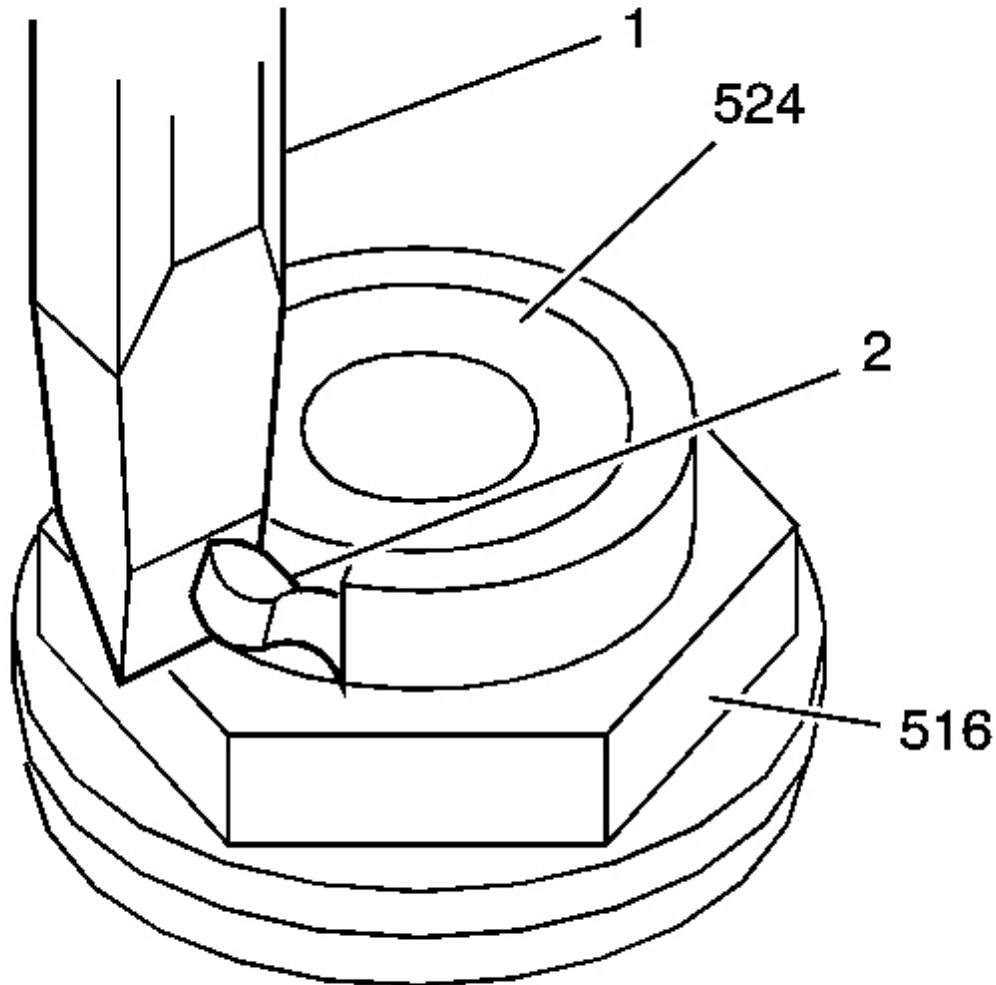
Using A Chisel Cut The Locktab On Output Shaft Retaining Nut
